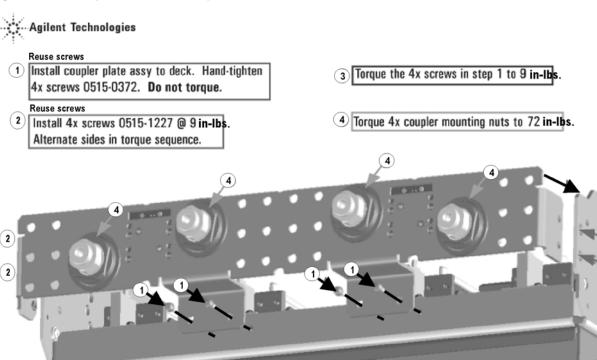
LED Board Assemblies and Test Port Coupler Assemblies Installation
